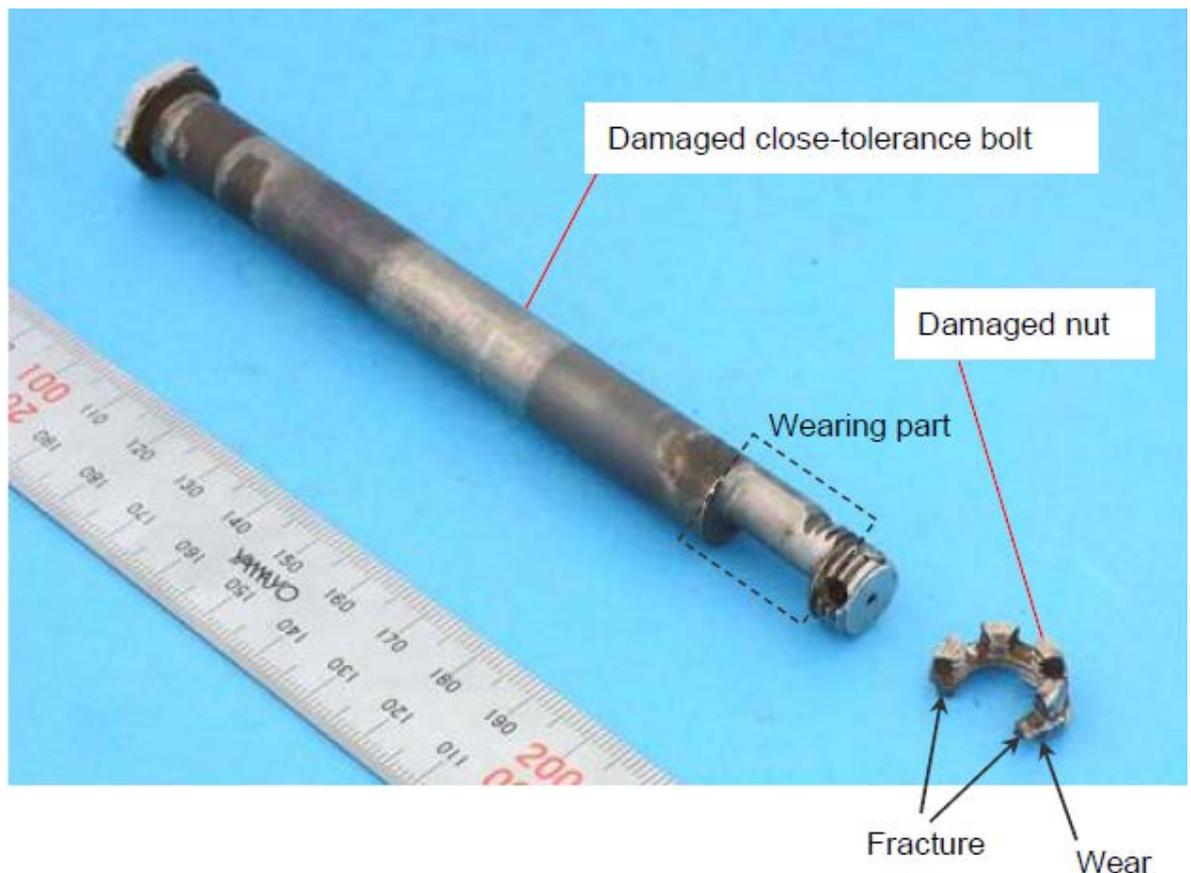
Damaged close-tolerance bolt and nut.
